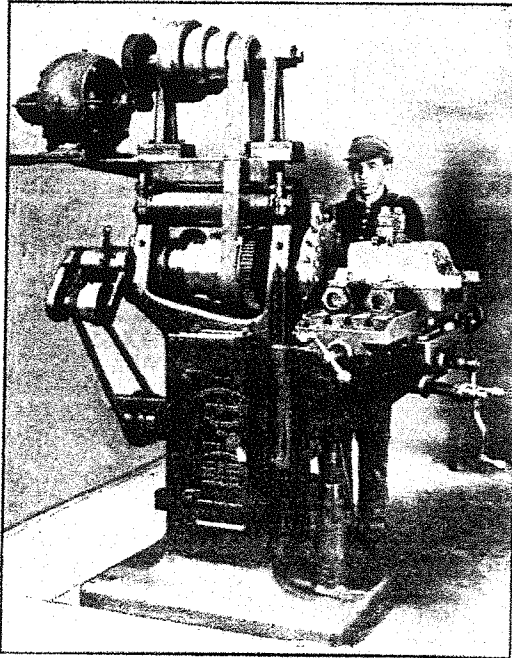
MILLING MACHINE, MOTOR-DRIVEN.
